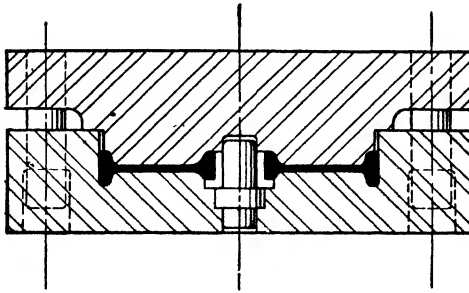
Semi-positive compression mold with insert, knockout, slight overflow relief and guide pins.
